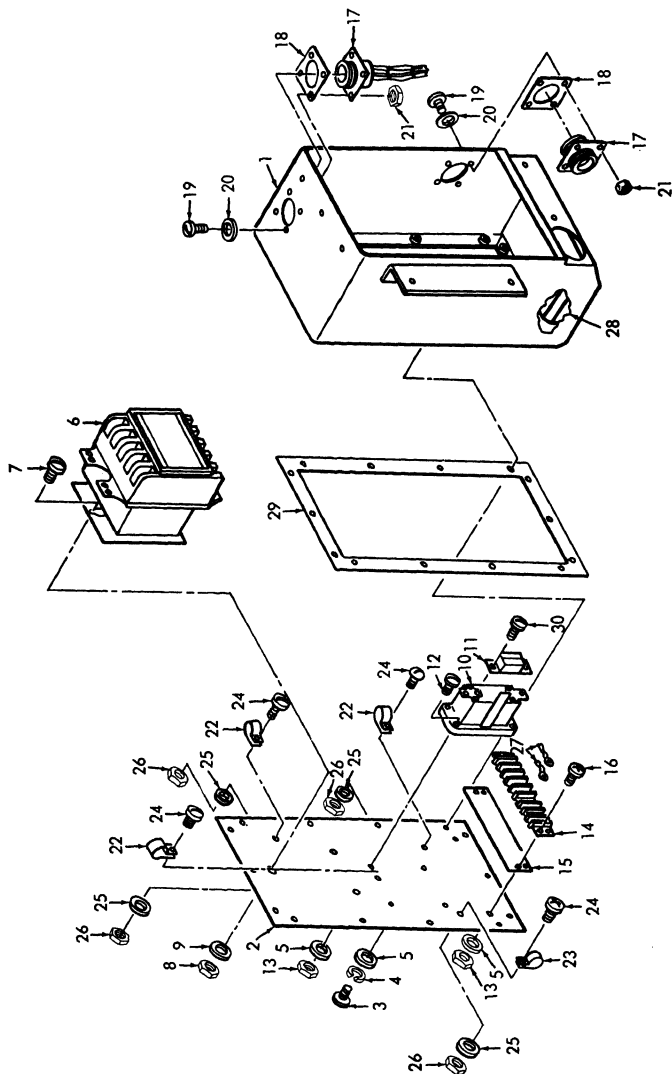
Evaporator fan motor control box, disassembly and reassembly, exploded view.
